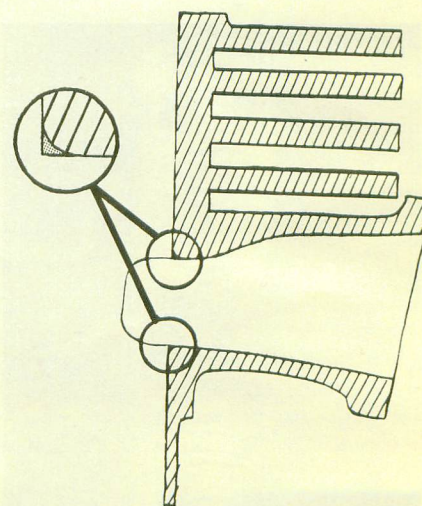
Manufacturers of some two stroke cycle engines recommend that top and bottom edges of ports be chamfered (as shown in the insert) after reboring to prevent piston rings from catching on the sharp edges of ports.
